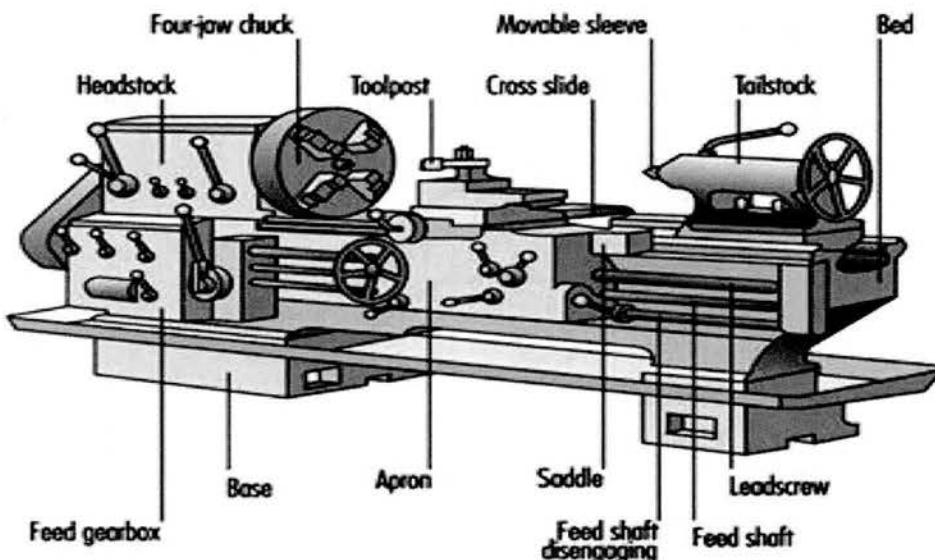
Typical parts in lathe machine (Hou, 2012)
